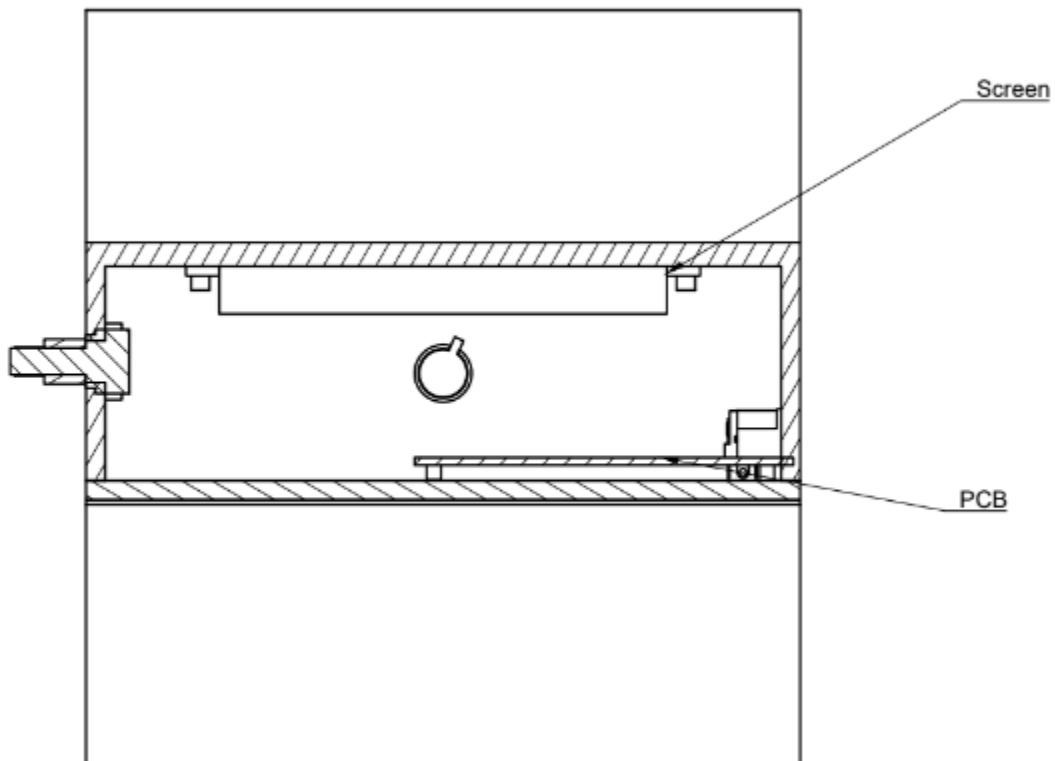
Top view of the ClassroomClairy casing with the top removed to reveal the PCB and screen attachment system
